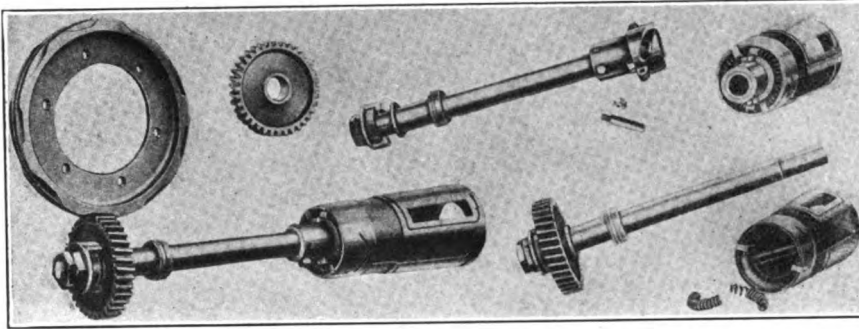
SHOWS THE PARTS OF THE SILENT VALVE MOTOR VALVE MECHANISM
